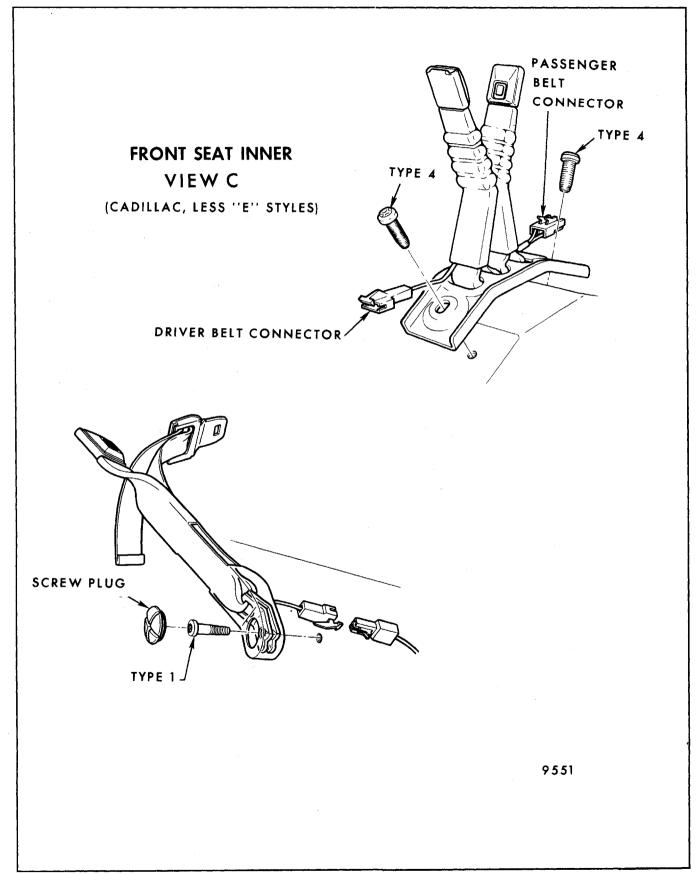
Front Seat Inner Belts - Cadillac Styles, Less E Styles
